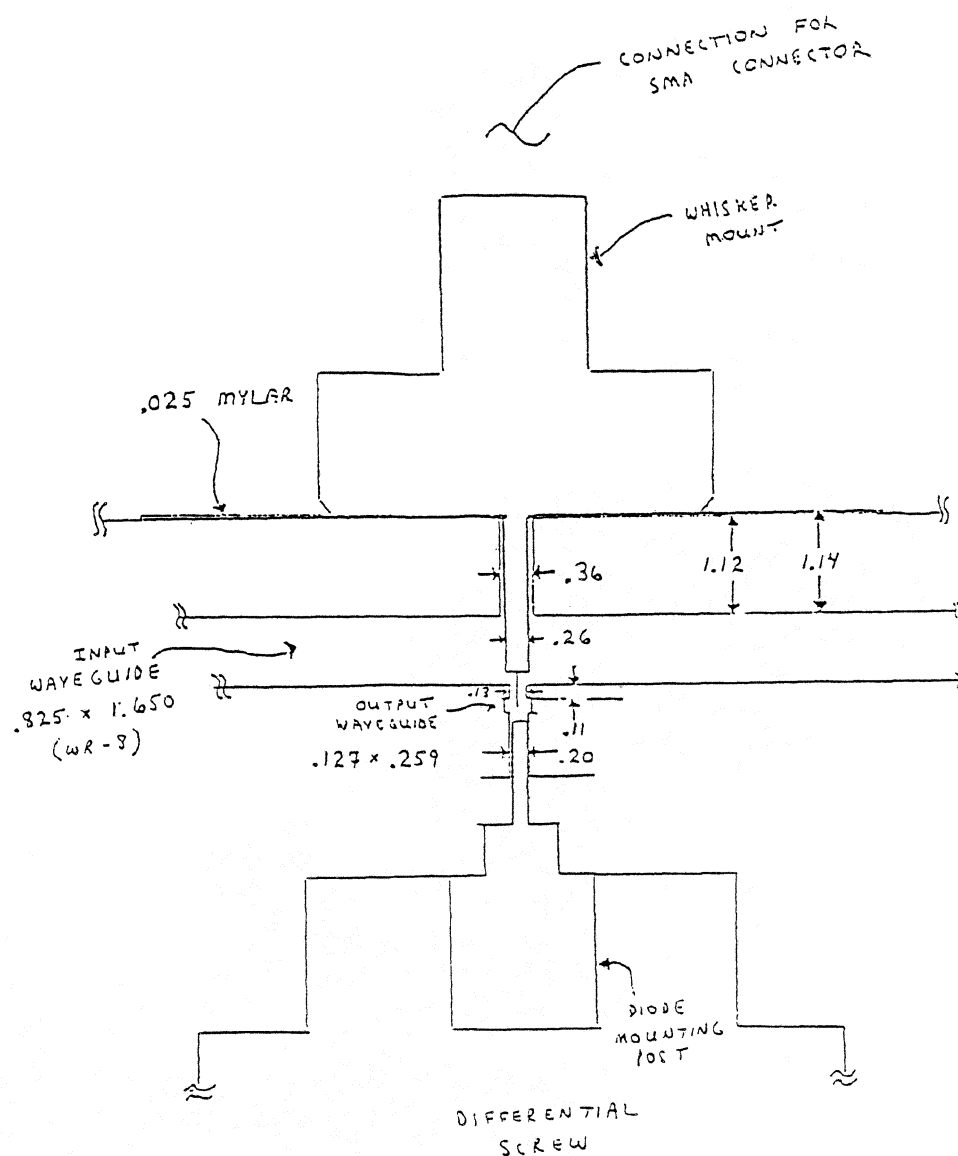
Layout and dimensions of the quintupler for 600-720 GHz. The dimensions are in millimeters.
